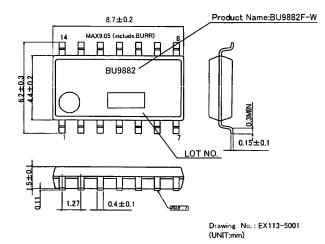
(b) PHYSICAL DIMENSION SOP14 (BU9882F-W)
